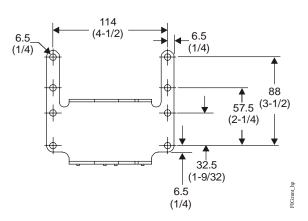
Hole Patterns in Mounting Brackets with Dimensions, mm (in.)
